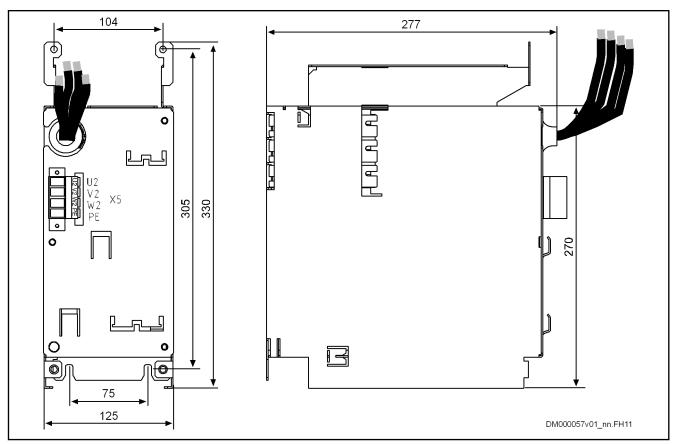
Motor filter HMF01.1A-N0K2-M0028-A-500-NNNN dimensions
